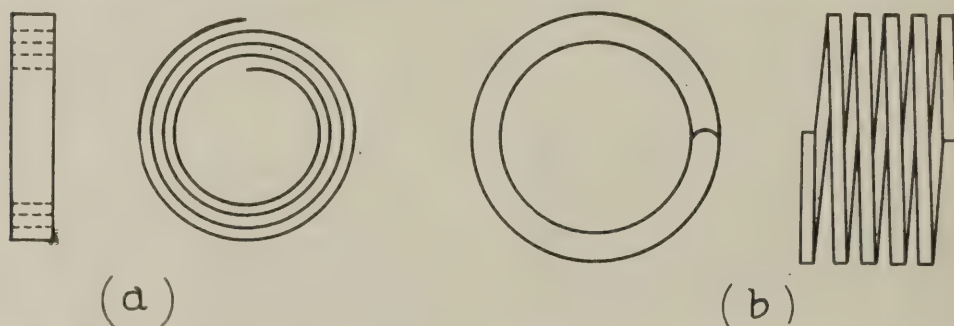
Types of Strip Inductances (a) Flat Spiral; (b) Edgewise-wound.
